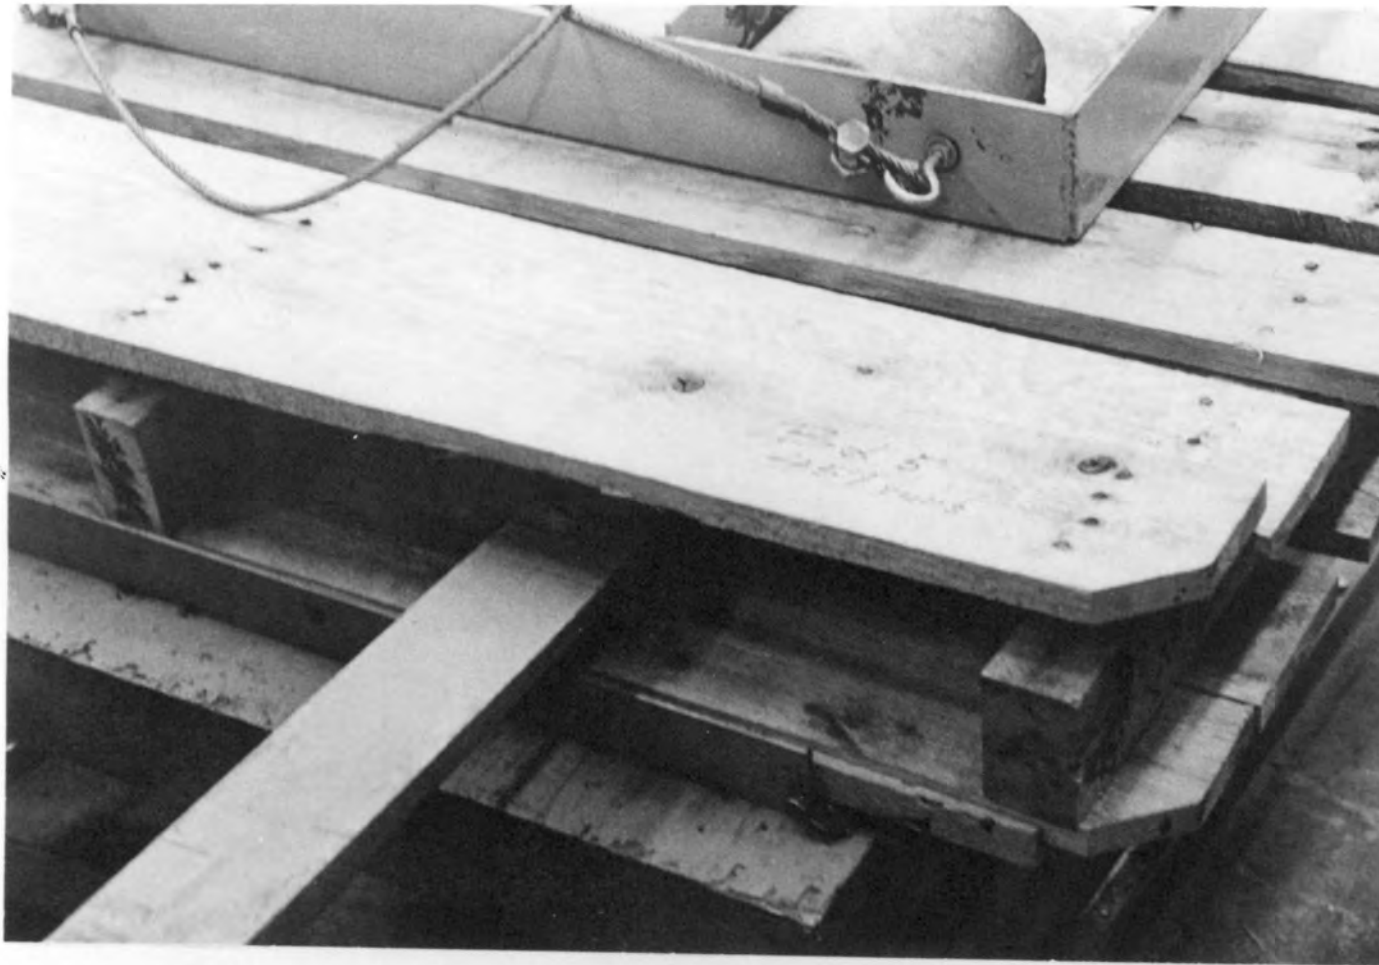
Failure of stevedore pallet of improved design (Bd5), assembled with 3" x 0.120" helically threaded, hardened-steel pallet nails, after 451 runs during impact incline deckboard-stringer separation test, with impacted leading-edge deckboard fully separated from two stringers.
